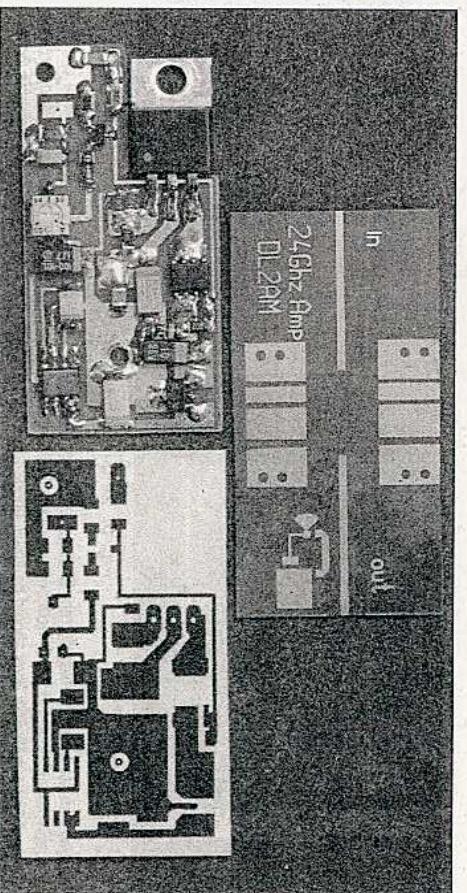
DCpart PCB and layout (bottom) and RF PCB (top)
